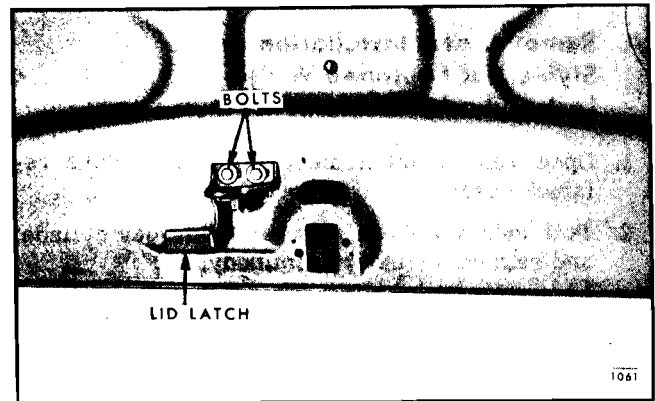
Engine Compartment Lid Latch Assembly - "Z" Styles
